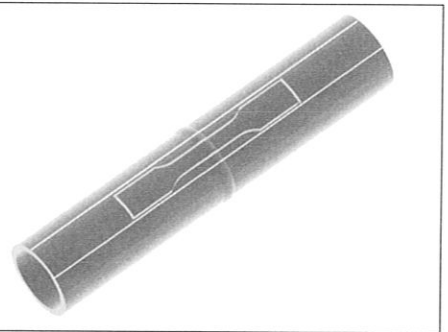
Schematic picture of one weld tensile test specimen taken in a tube. The lines show how the test specimen is to be extracted using sawing.
